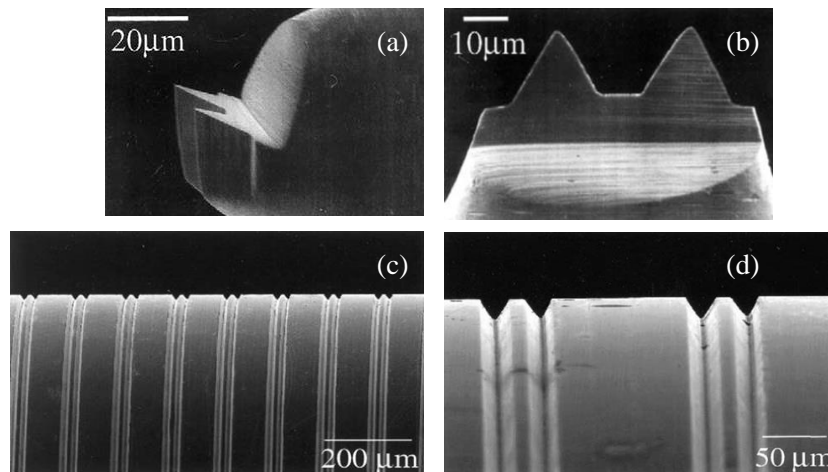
FIB shaped two-tip micro tool having triangular cutting faces and the machined micro-grooves. (a) and (b) show the tool tips; (c) and (d) show the machined grooves on PEEK workpiece surface by the two-tip tool [32].
